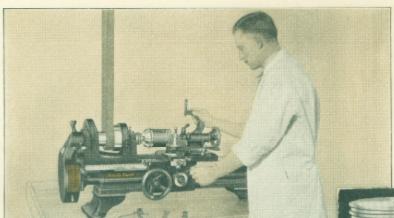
Machining a Piston to Finished Diameter in the 9-inch Lathe
